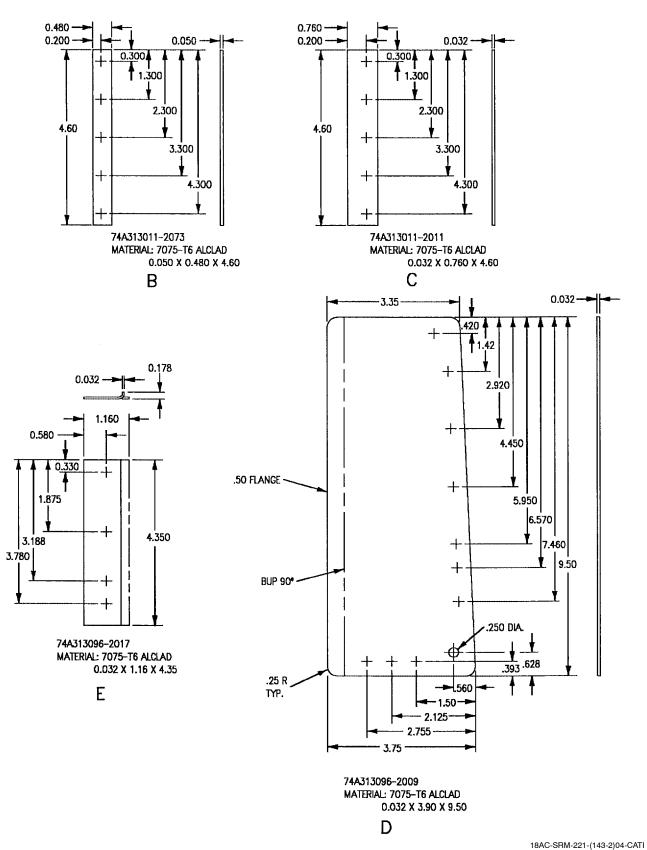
Replacement, Gun Purge Door EMI Seals (Sheet 2)
